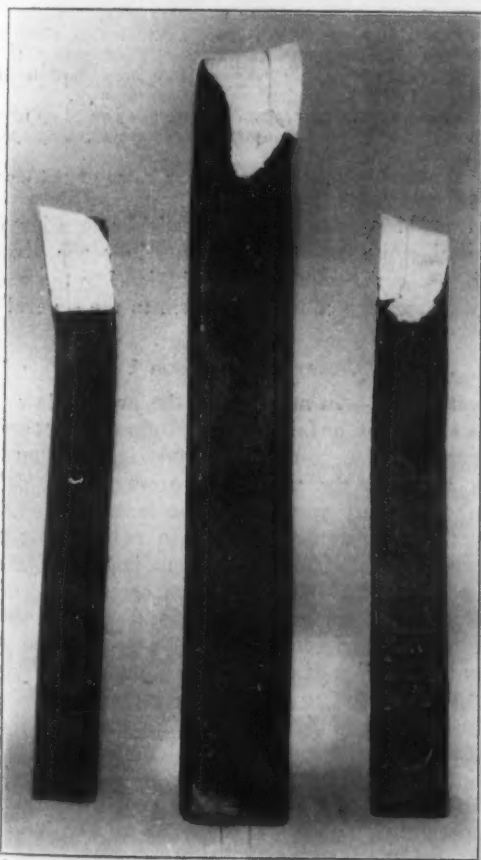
Lathe and Planer Tools, Consisting of a High Speed Steel Cutting Edge Welded to a Body of Machinery Steel, Made at the Shops of the J. A. Fay & Egan Company, Cincinnati, Ohio.
